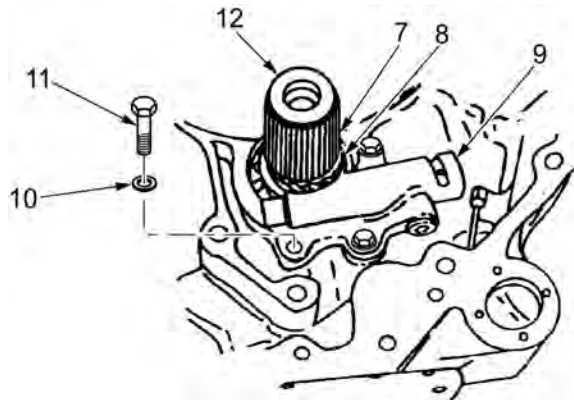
Governor Drive Gear and Governor Body Assembly Installation.
